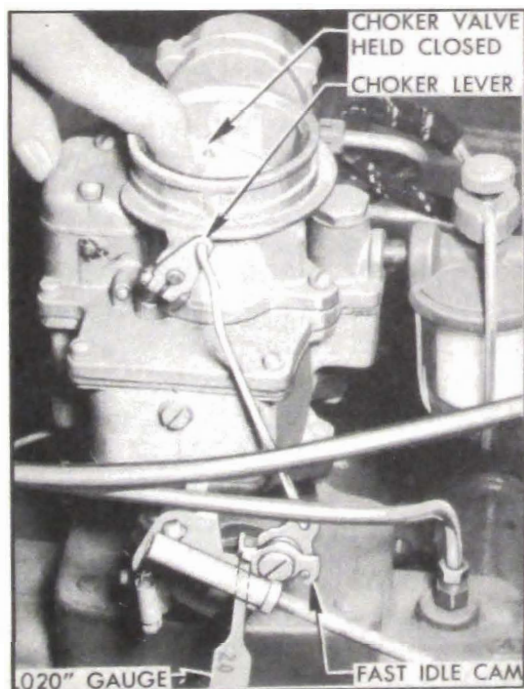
Clearance Between Fast Idle Cam and Boss
